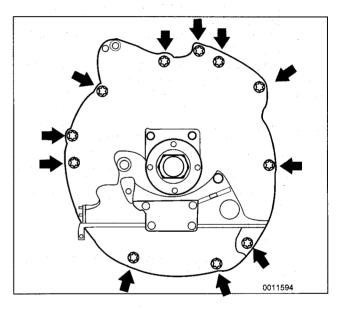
Transmission-to-engine Torx-head mounting bolts.
